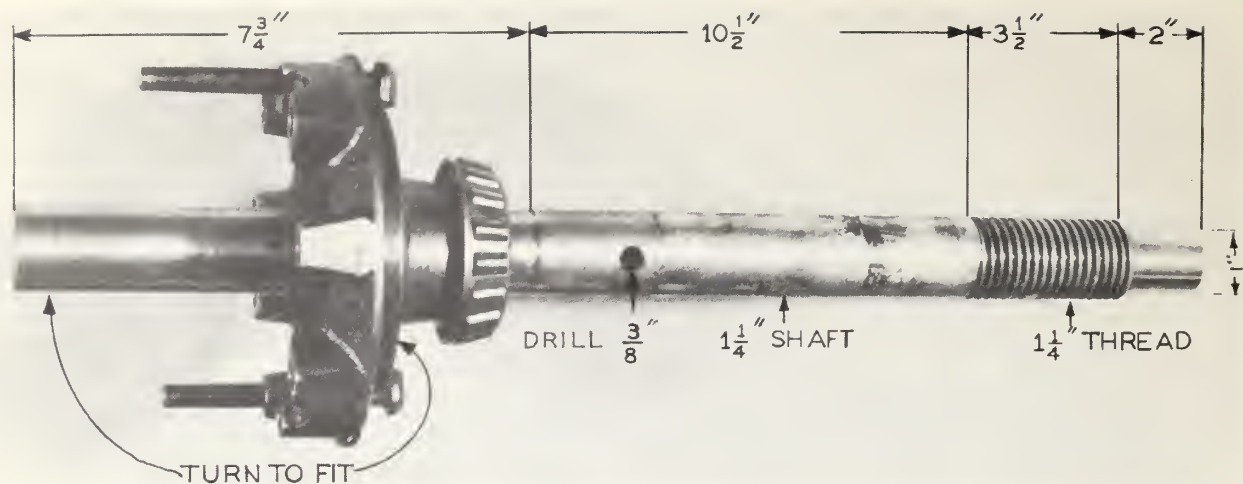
Countershaft machining dimensions. The exact location of the $\frac{3}{8}$ -inch drilled hole (for the snap-clutch pin B, fig. 7) is explained under "Snap-Clutch and Drive-Sprocket Assembly."
